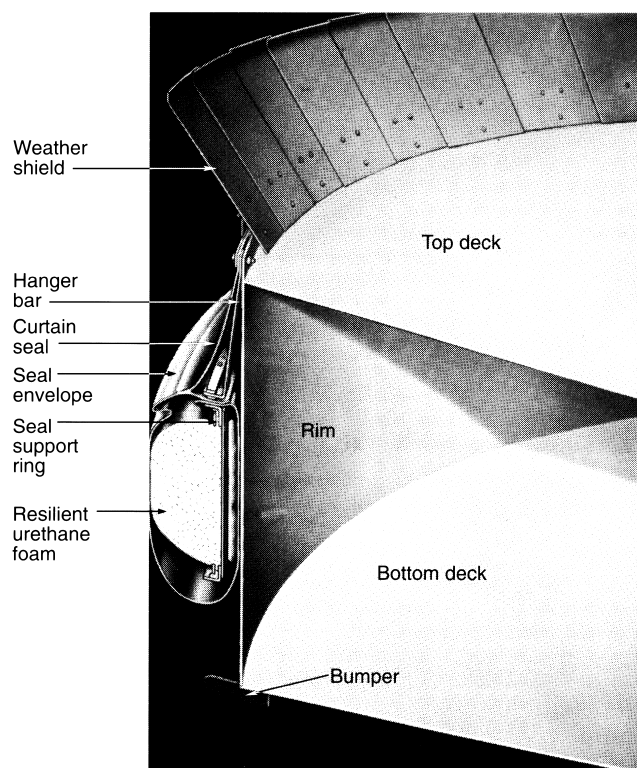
(b) Tube Seal Open-Top Floating Roof Tank.
